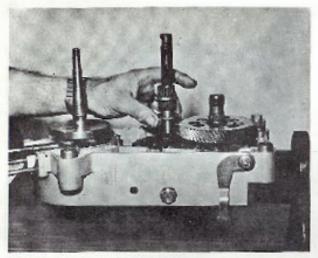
Remove the roller bearings and the spacer and lower washers from the pedal crankshaft.
